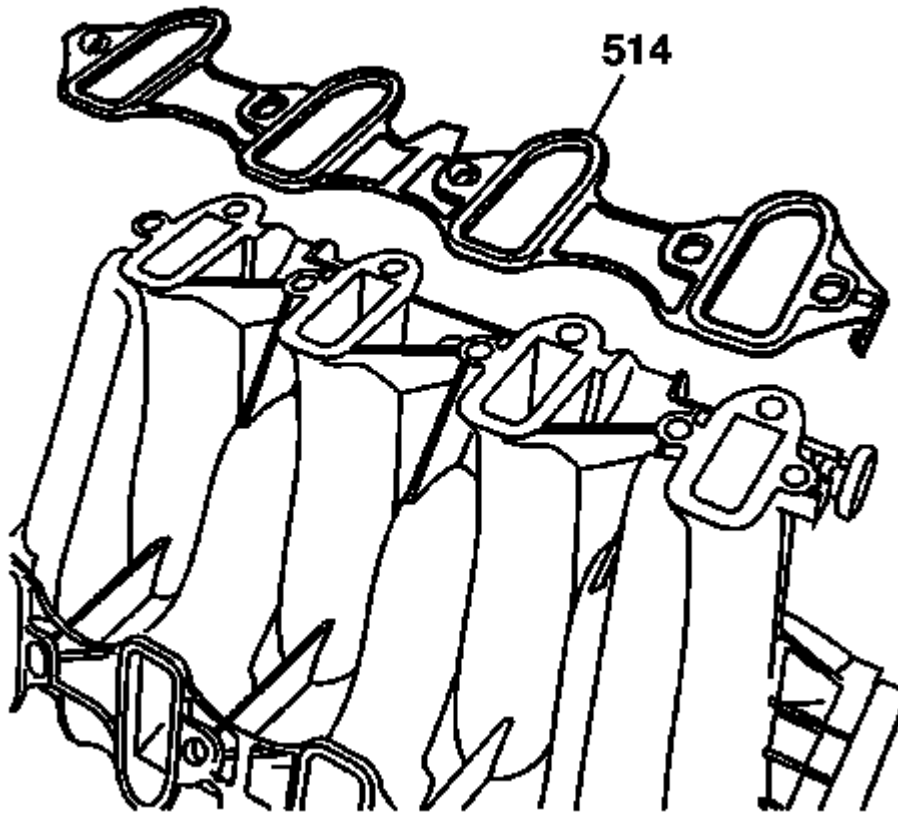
View Of Intake Manifold-To-Cylinder Head Gasket
